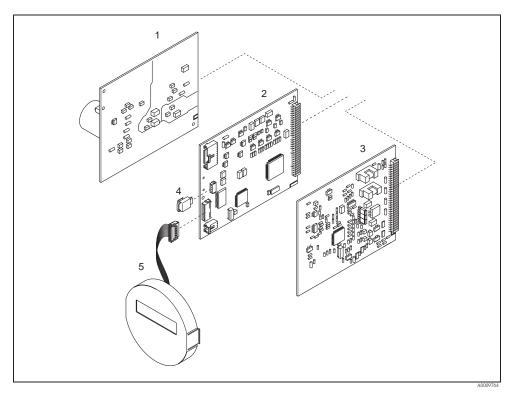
Spare parts for Promag 50 transmitter (field and wall-mounted housings)
